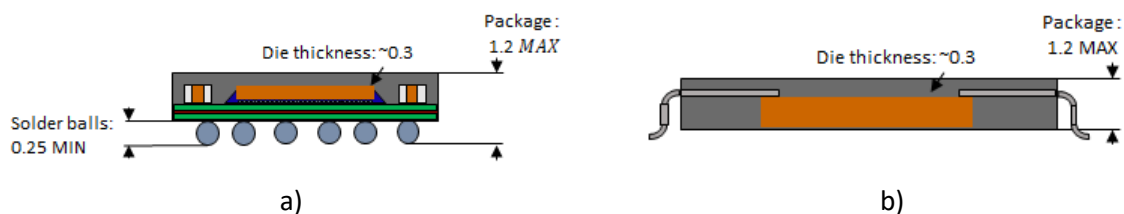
Flash package dimensions in millimeters. a) BGA QSPI NOR Flash package. b) TSOP NAND Flash package
